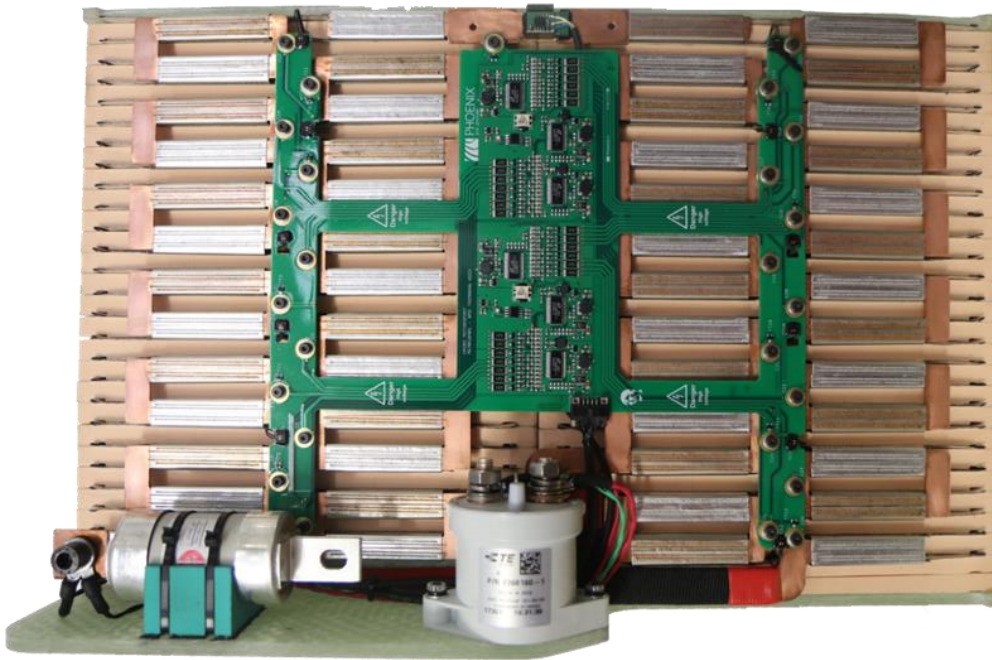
BMS PCB Assembly fitted to the battery pack
